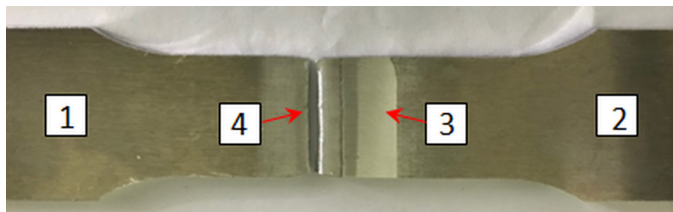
Exemplary fracture in a butt joint after tensile test with a visible crack in the base material EN AW-6082
